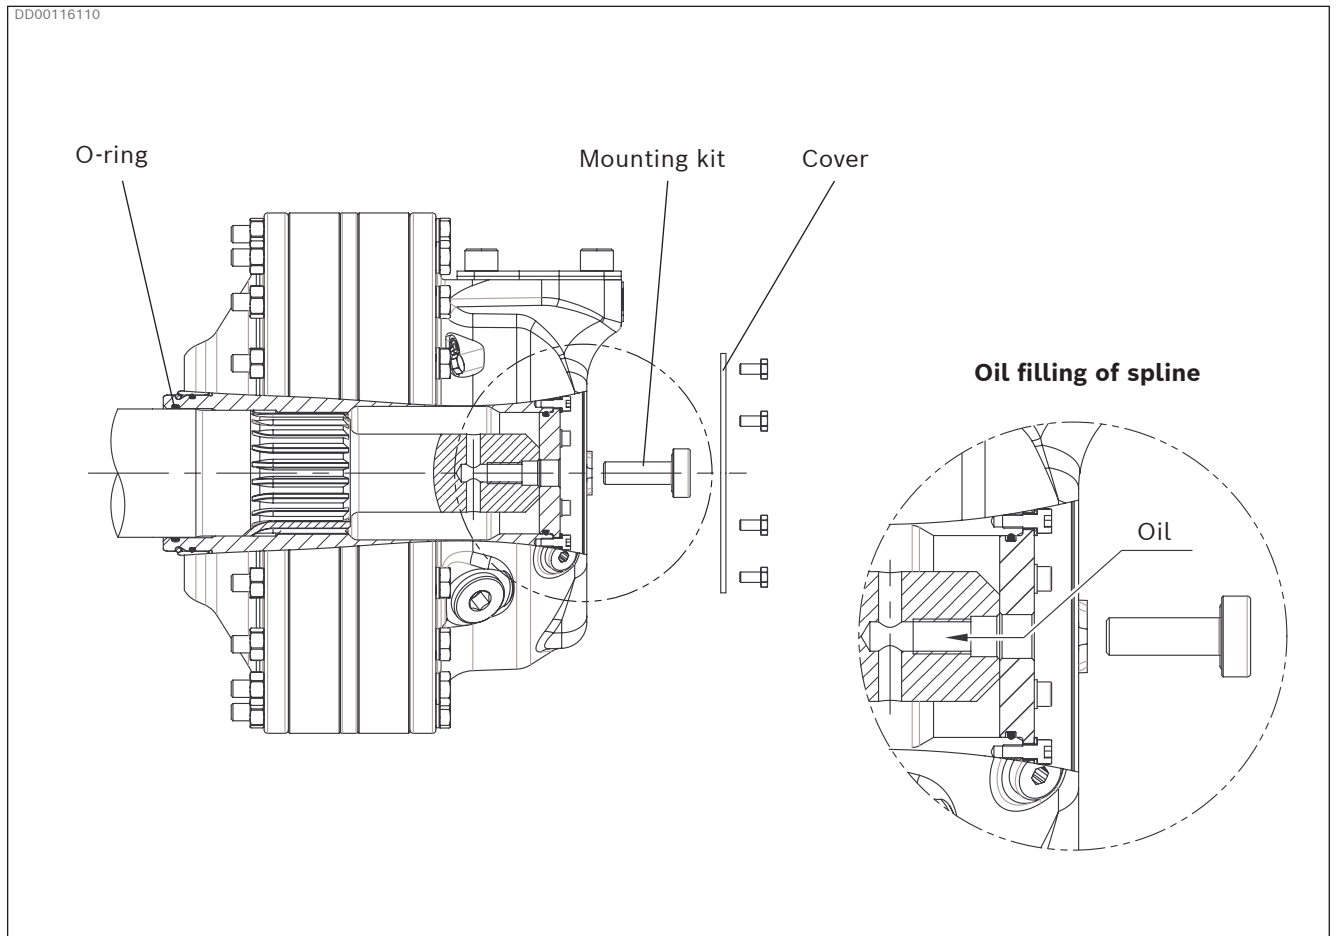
Fix the spline motor with the mounting kit, horizontal mounting
